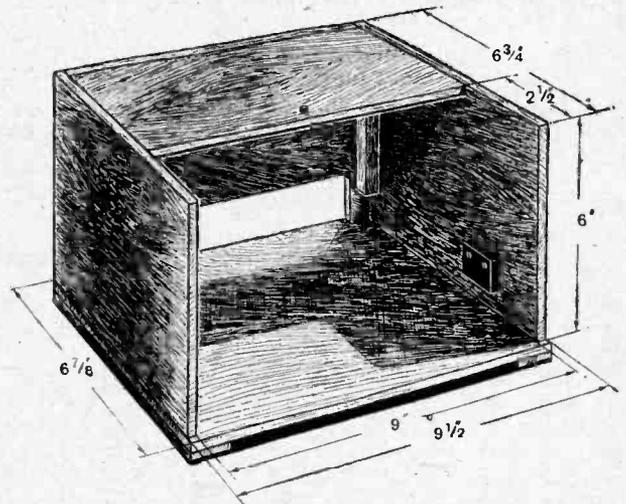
Leading dimensions of the cabinet. The rectangular hole at the back is cut to fit the terminal strip after the set has been completed.
